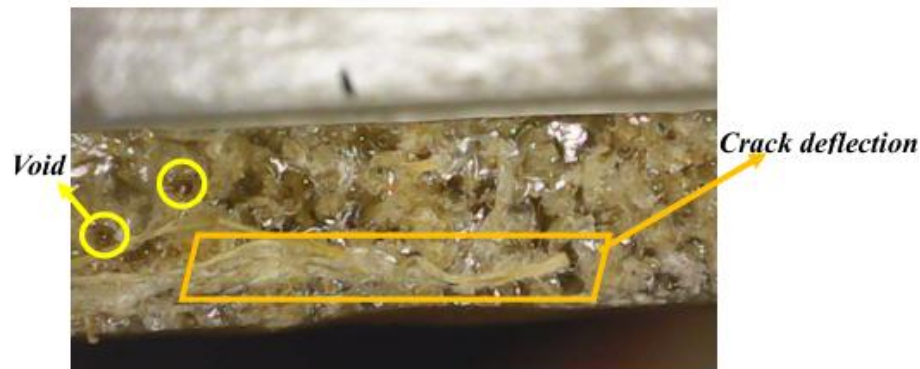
Macroscopic image of tensile fracture surface in sample E70.
